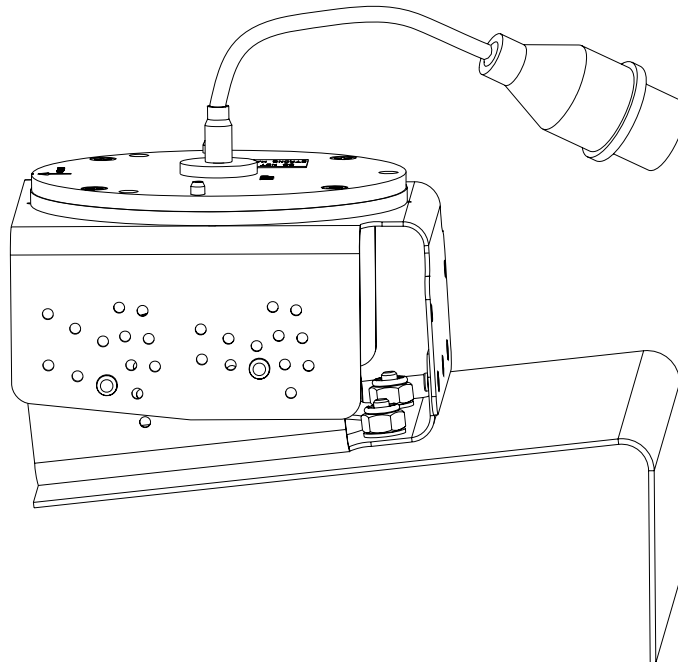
GMU 44 Universal Mount, Bottom Plate Mounted
